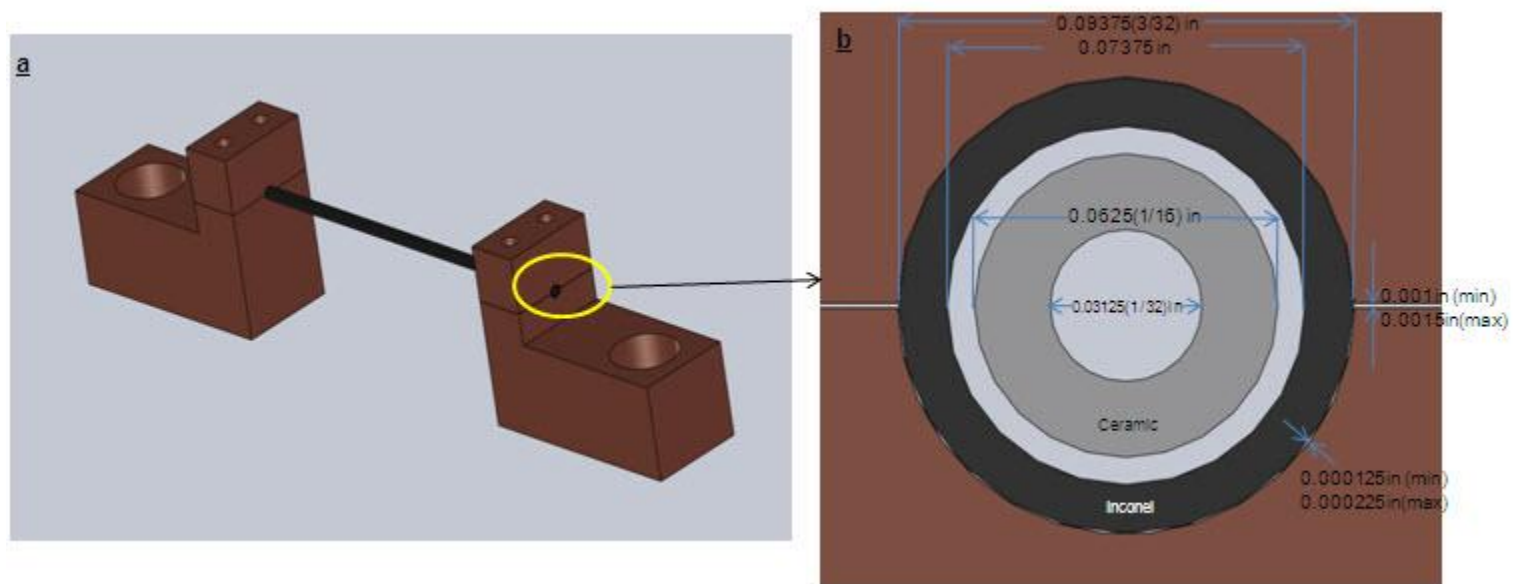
Heater Tube Clamp Design Tolerances
